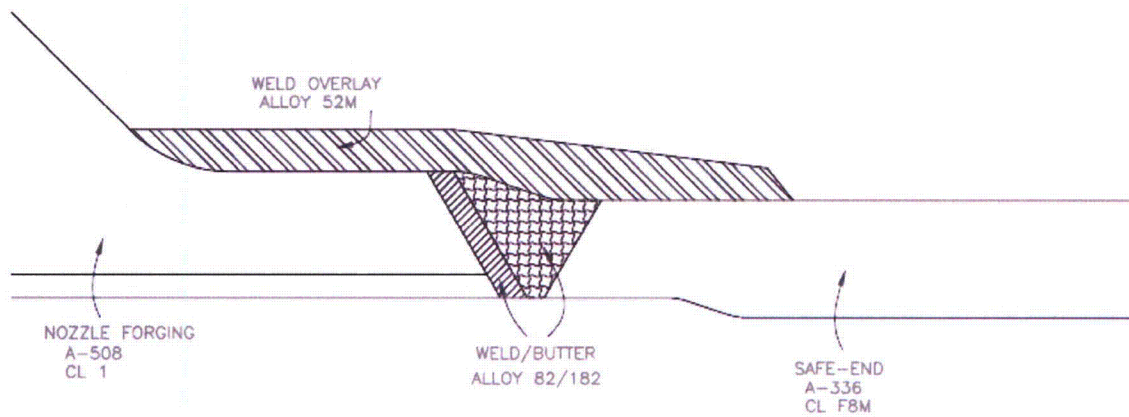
Illustration of Weld Overlay Design for Davis-Besse Pressurizer Surge Nozzle
